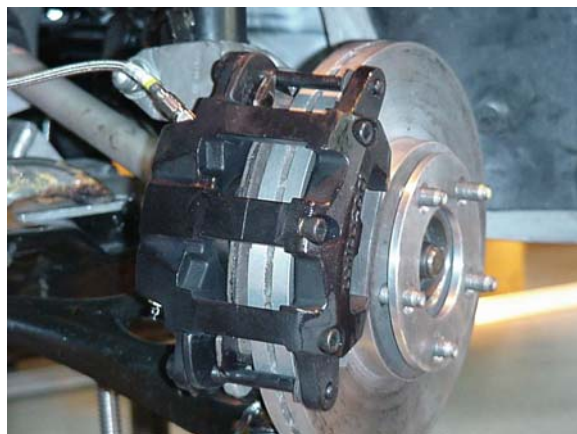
Steering assembly showing lightweight components: bi-metal aluminum rotor and caliper, special break shoes, aluminum bearing housing, and custom axles.
